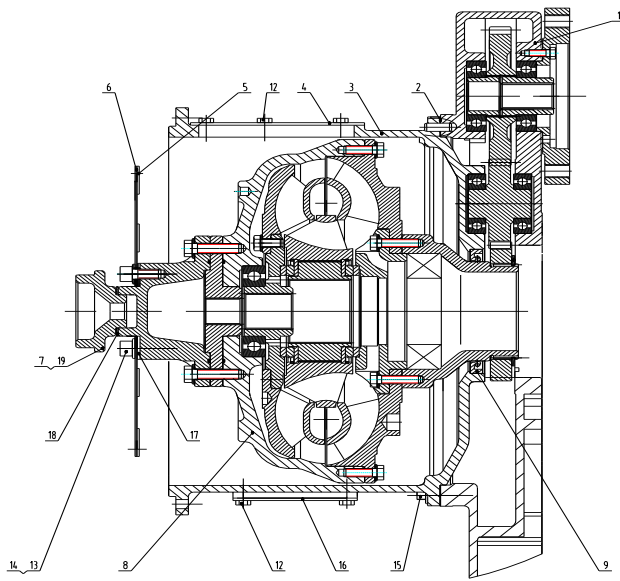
Z50G02T21 Torque Converter Assembly and Structure Schematic Diagram
